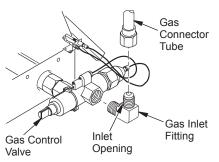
Installing Inlet Fitting and Gas Connector Tube
